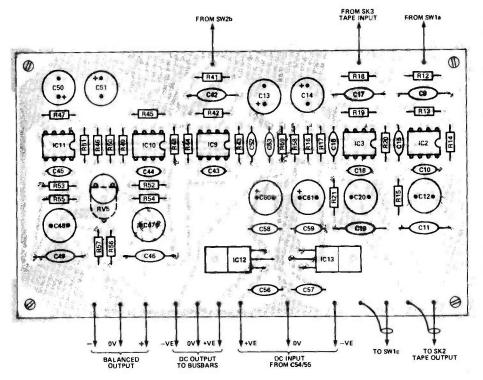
Component overlay of the tape buffer, balanced output and PSU board.
